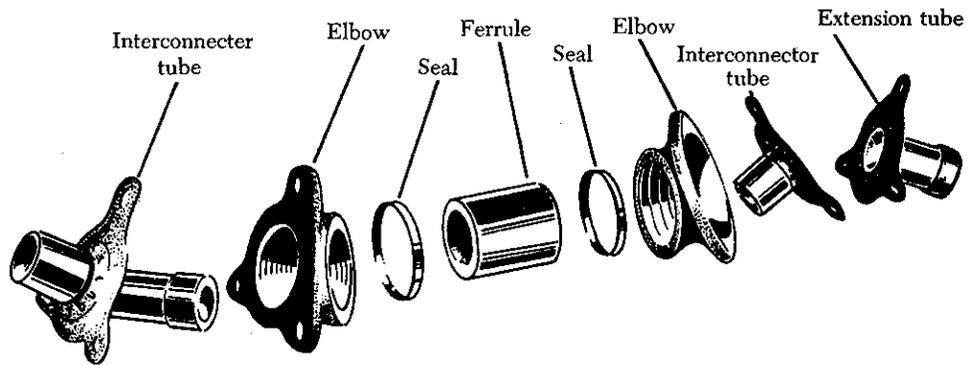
Interconnecting flame tubes for can-type combustion chambers.
